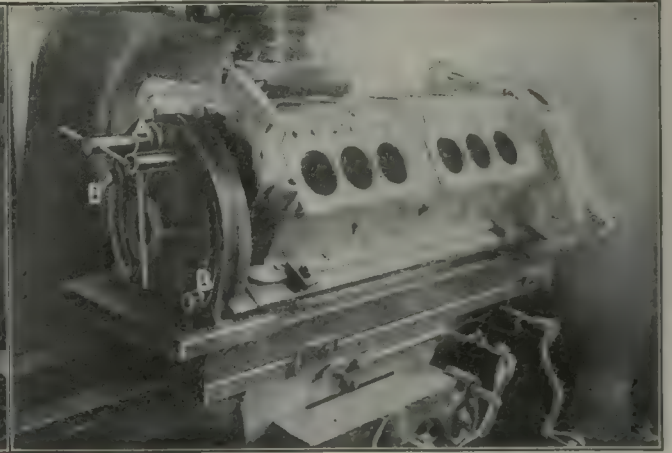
MACHINING ANGULAR SURFACES ON THE CRANK CASE
